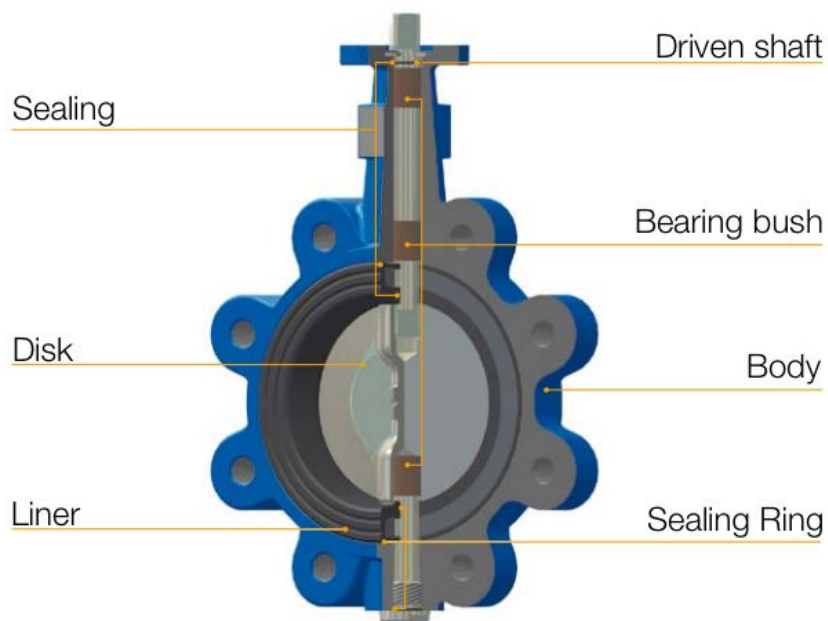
schematic view of the VAG Cerex-L butterfly valve
